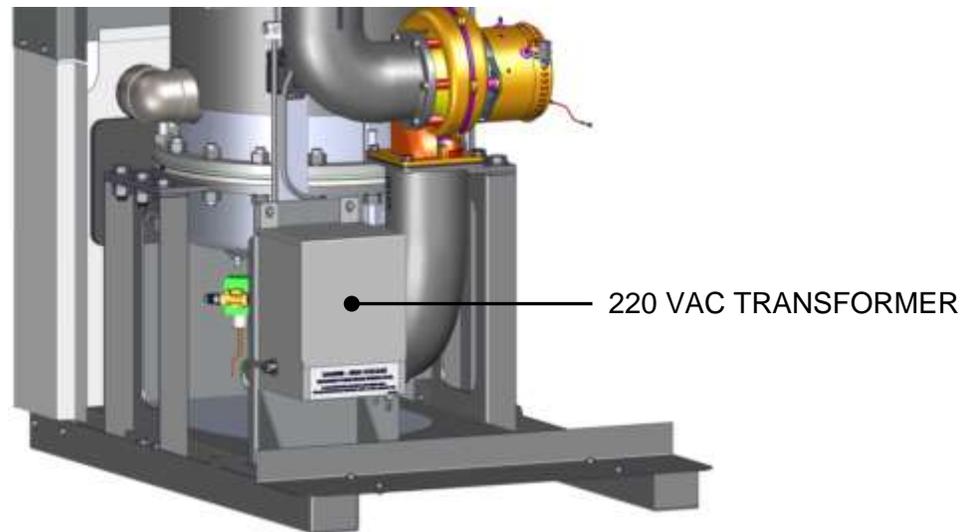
Power Box Location – Partial Front View, Front Panel Removed
